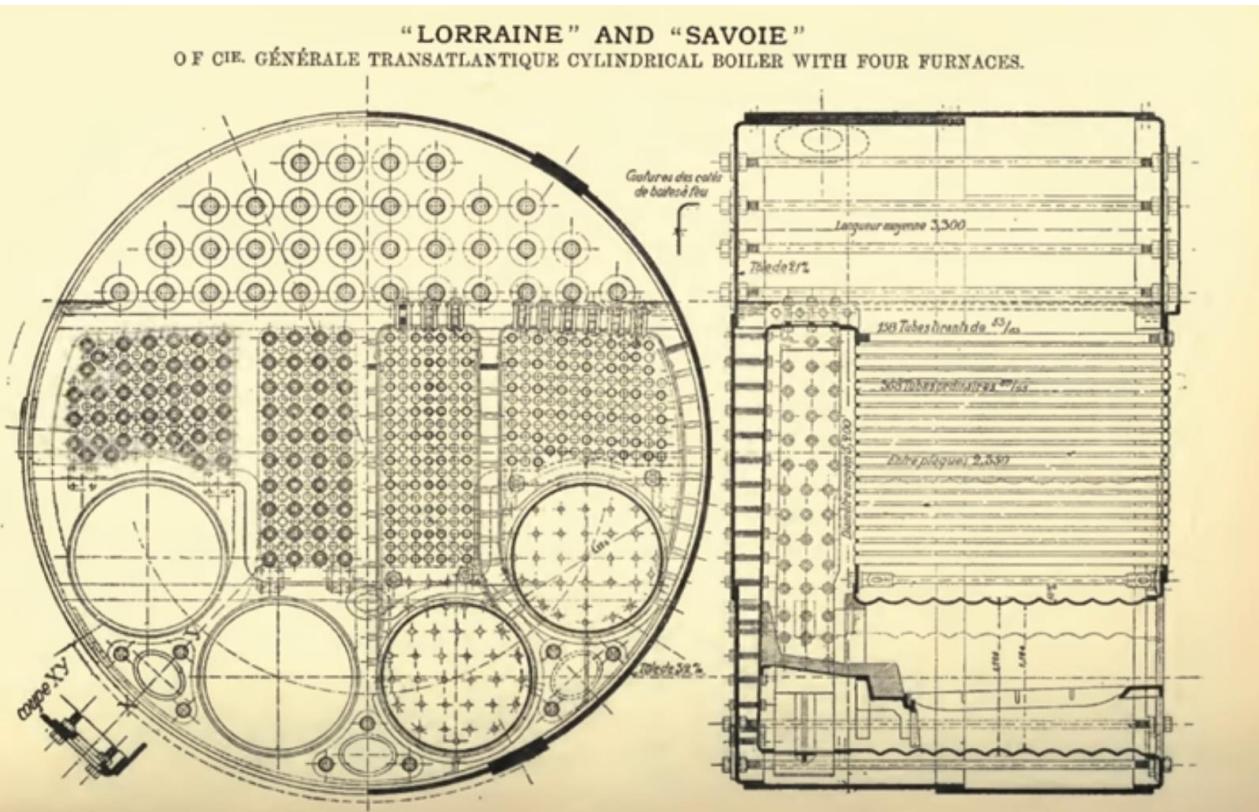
CYLINDRICAL RETURN TUBE BOILER.
